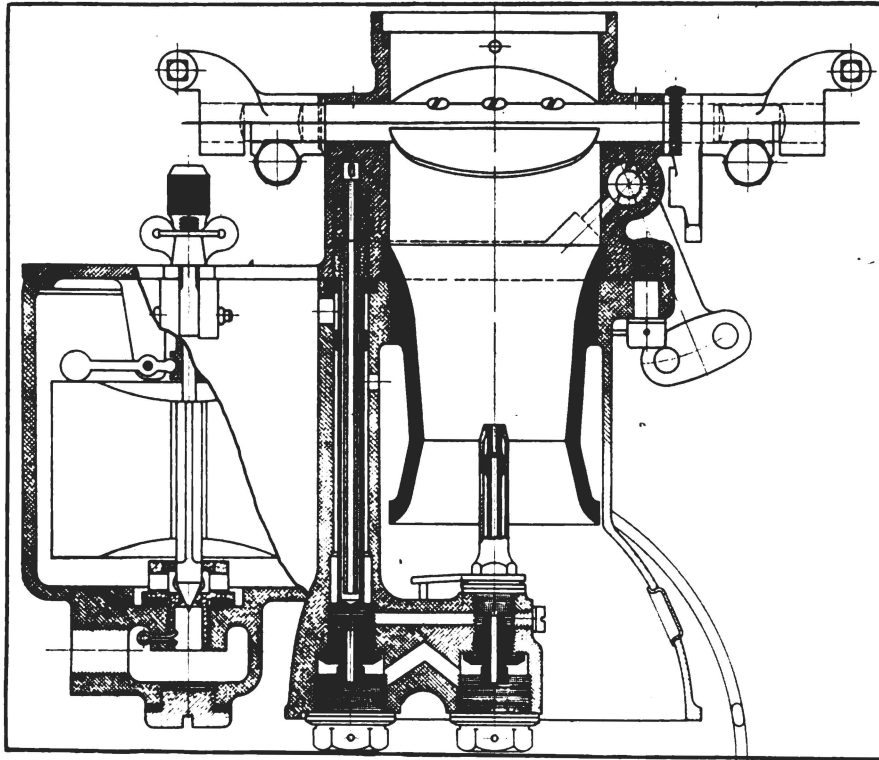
Sectional view of Zenith carburetor, Model U. S. 52.
